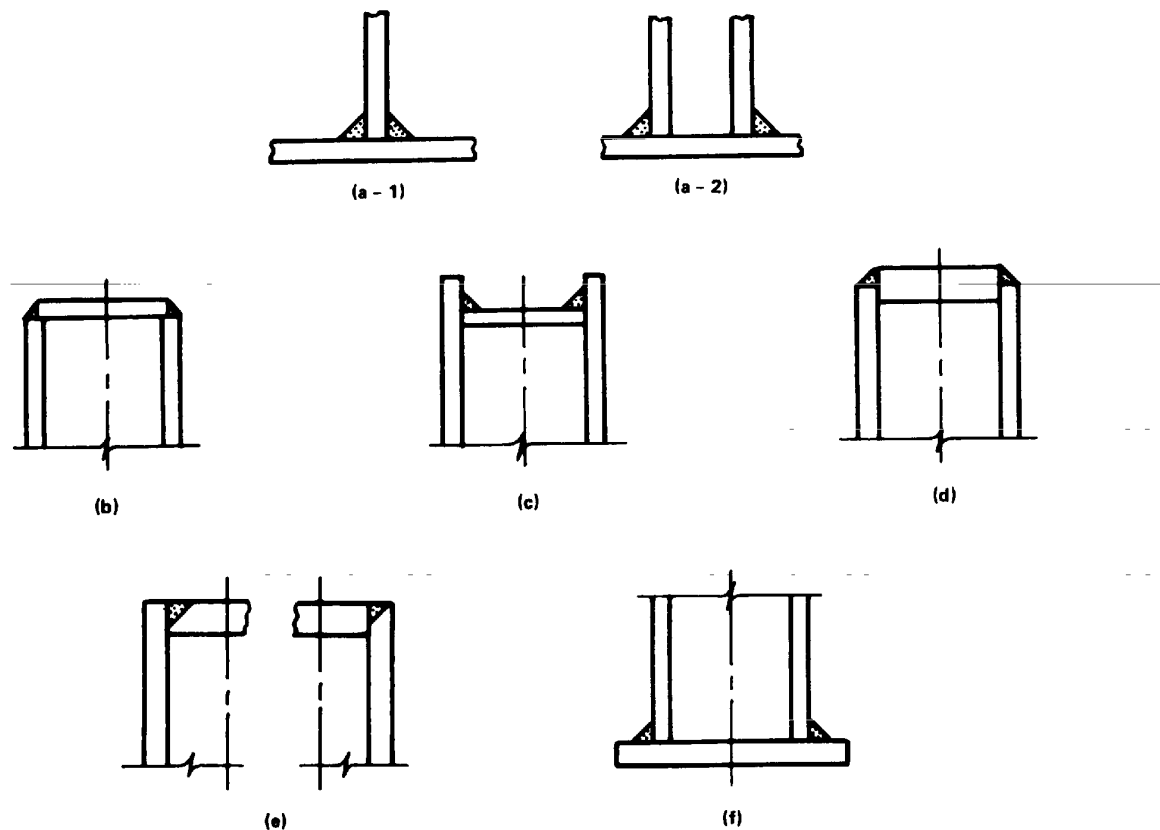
ADDITIONAL PERMISSIBLE WELDED JOINTS FOR CLASS 1 STANDARD SUPPORTS
